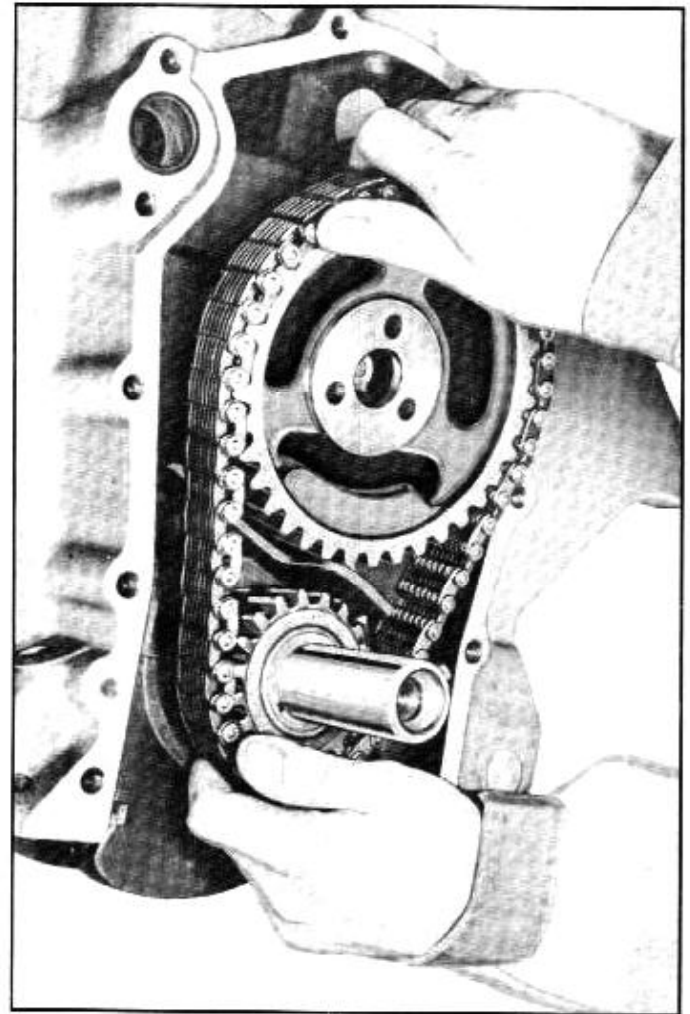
C-33—Removing Timing Chain and Camshaft Sprocket
